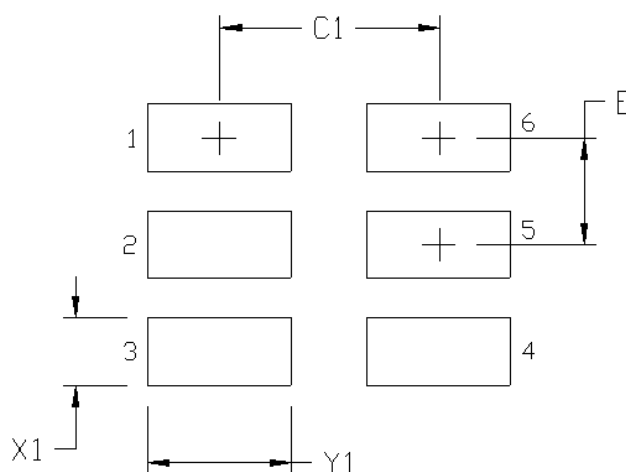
Si540 (3.2×5 mm) PCB Land Pattern
